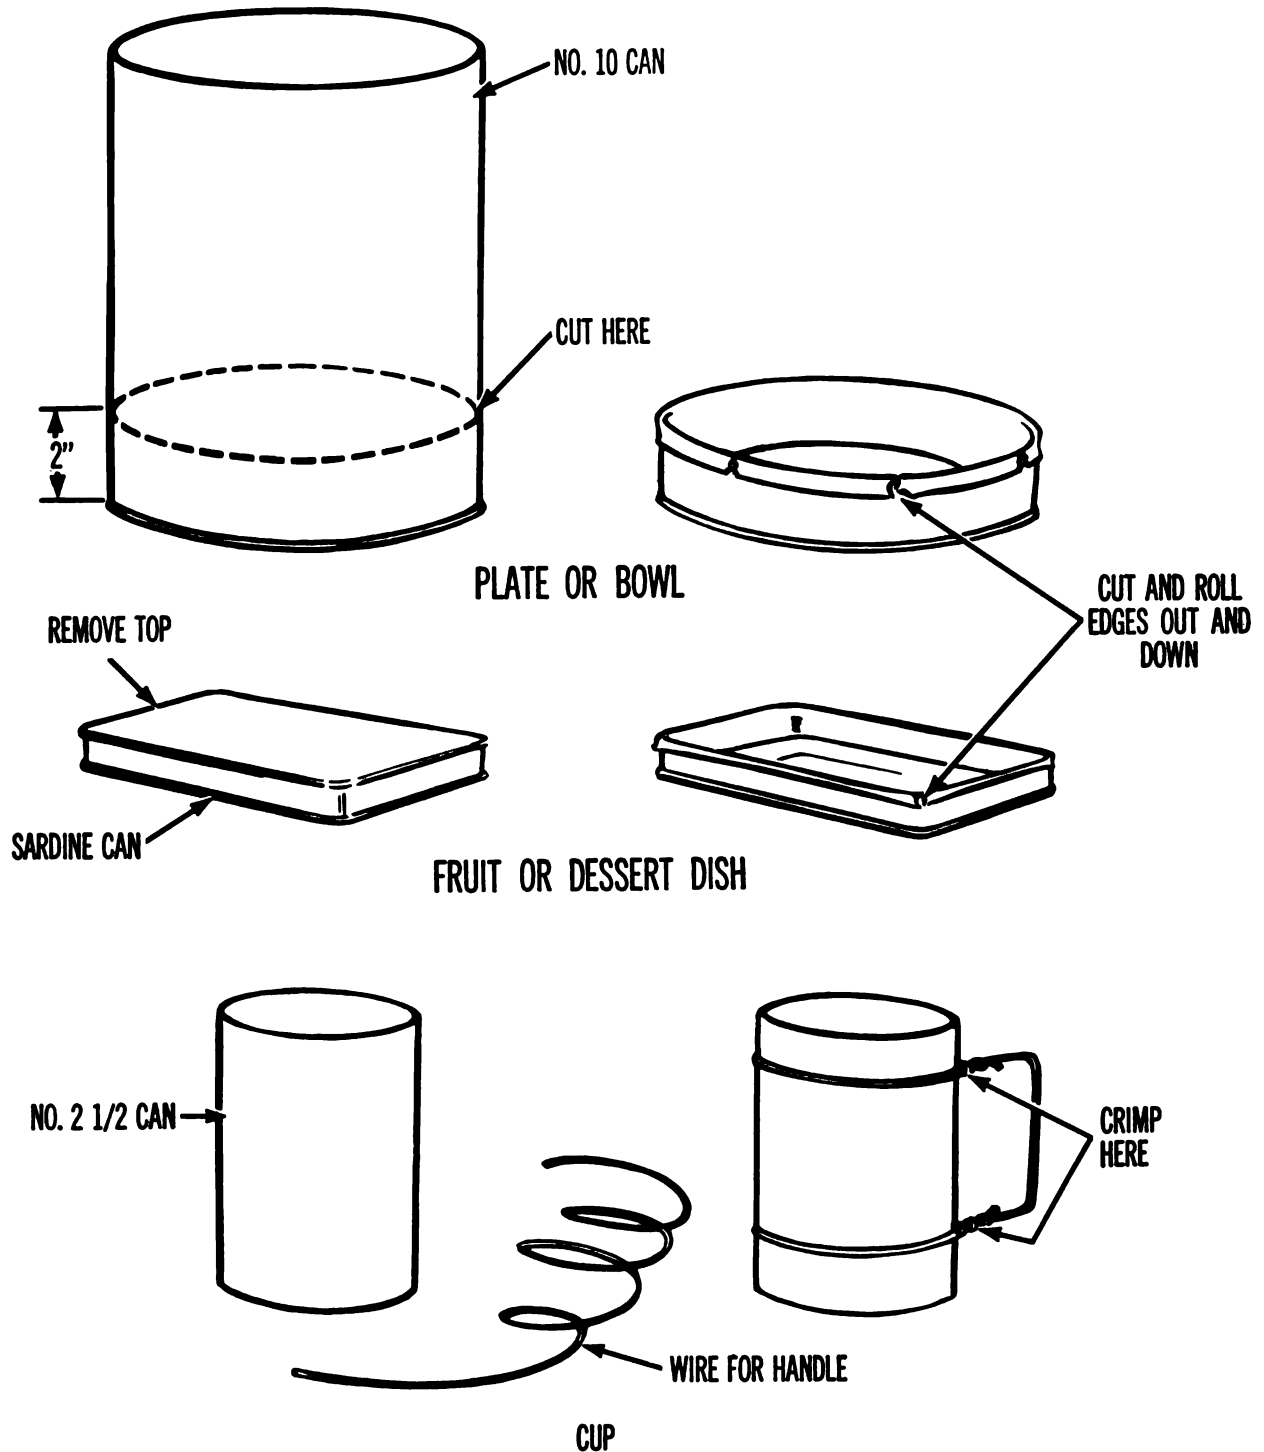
Plate or bowl, fruit or dessert dish, and cup, fabrication details.
